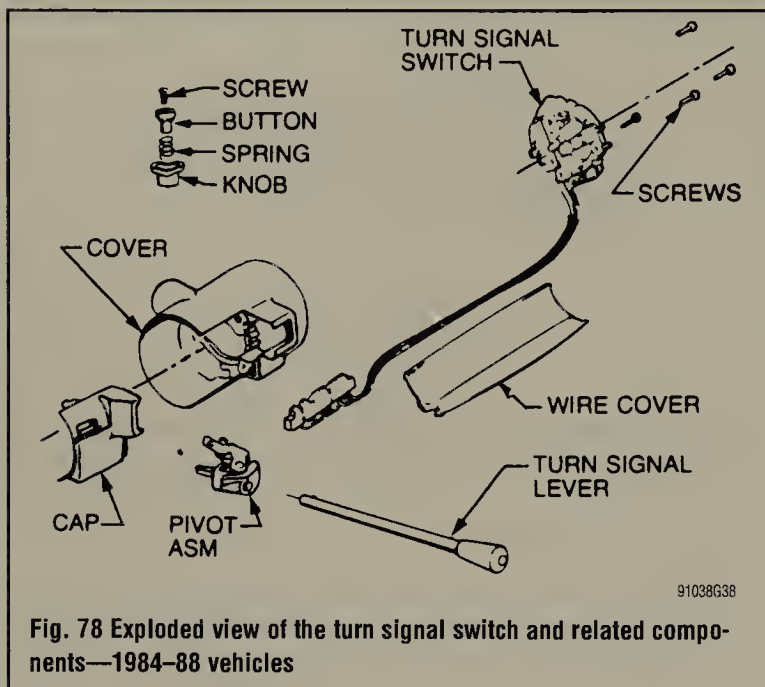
Exploded view of the turn signal switch and related components—1984-88 vehicles
